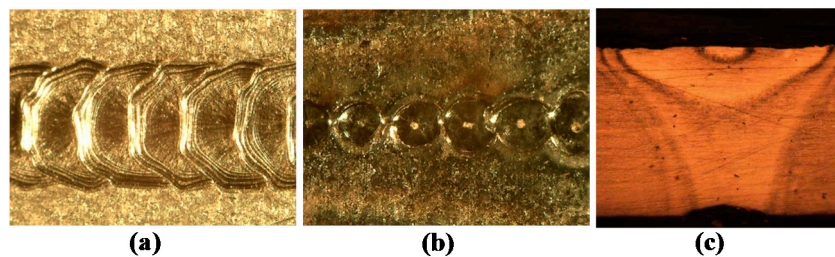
Weld surfaces of fusion zone using the optimal parameters: (a) Top surface (15×); (b) bottom surface (15×); (c) perpendicular longitudinal section.
